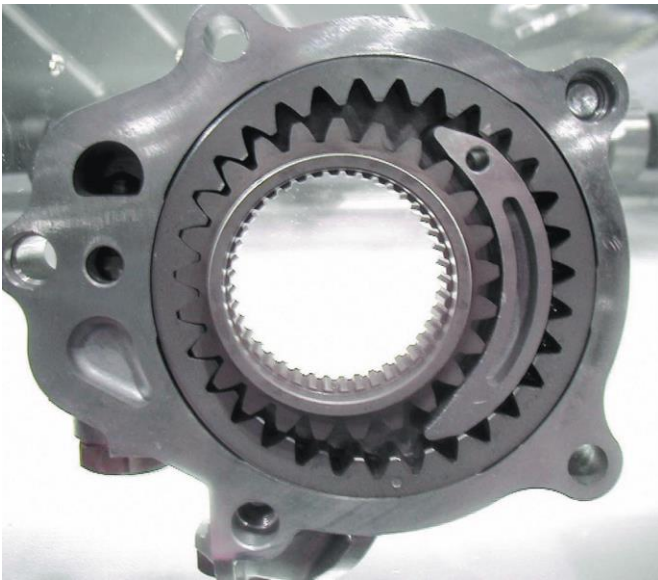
This oil pump is driven by the crankshaft and is located in the front engine cover.
